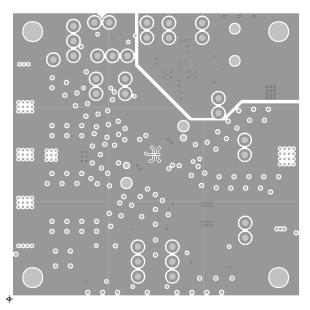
TUSB2E221EVM PCB Layer 2 (Ground Plane)
